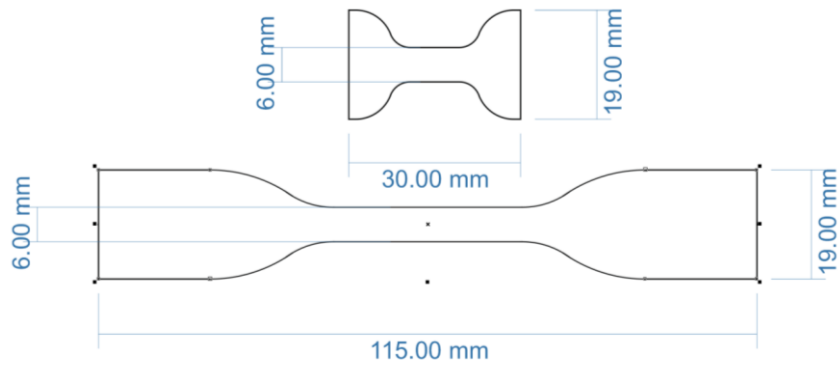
Top, the scaled down tensile specimen used for the extensometer testing. Bottom, original tensile specimen derived from American Society for Testing and Materials (ASTM) standard D638-10. The axial dimensions were kept the same to have the same cross sectional area.
